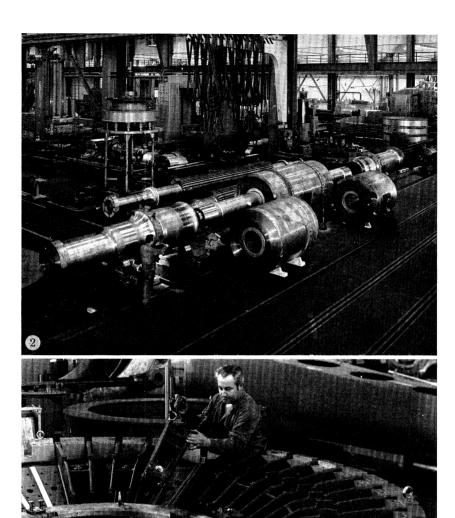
Multi-block rotor for 4-pole generators 1333 MVA/1100 MW consisting of one centre-body piece, two end-body pieces and a central shrink shaft with two shaft ends.
